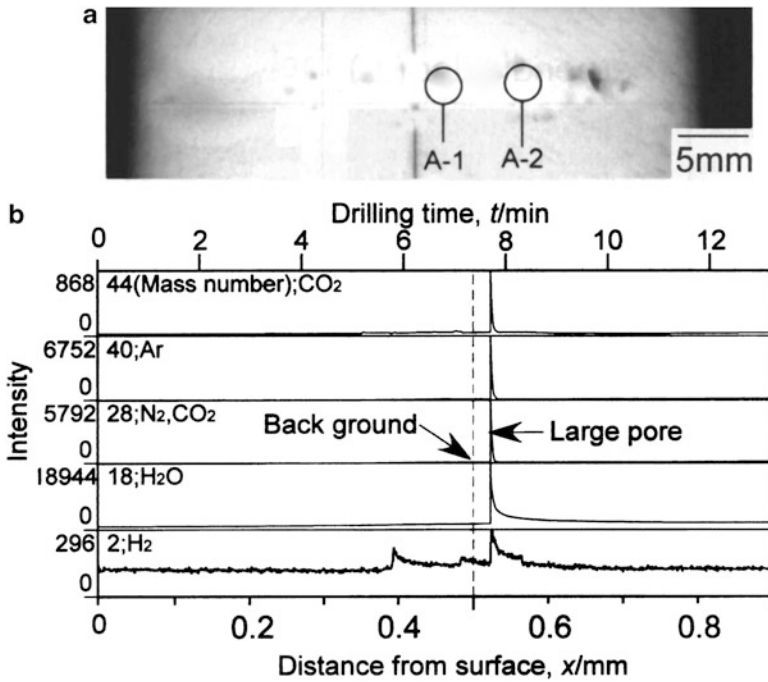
(a) X-ray radiograph of the workpiece after welding with the welding speed of 3.33 mm s^{-1} at the laser beam power of 3.2-kW depth of 4 mm thick. The drilling points determined were in the *open circle* including the shadow of weld pore as A-1 and A-2. (b) Dependence of mass spectral intensity of gas detected from A-2 on drilling time and the distance from the weld bead surface (Reprinted with permission from [4] ©2003 Elsevier Science B.V.)
